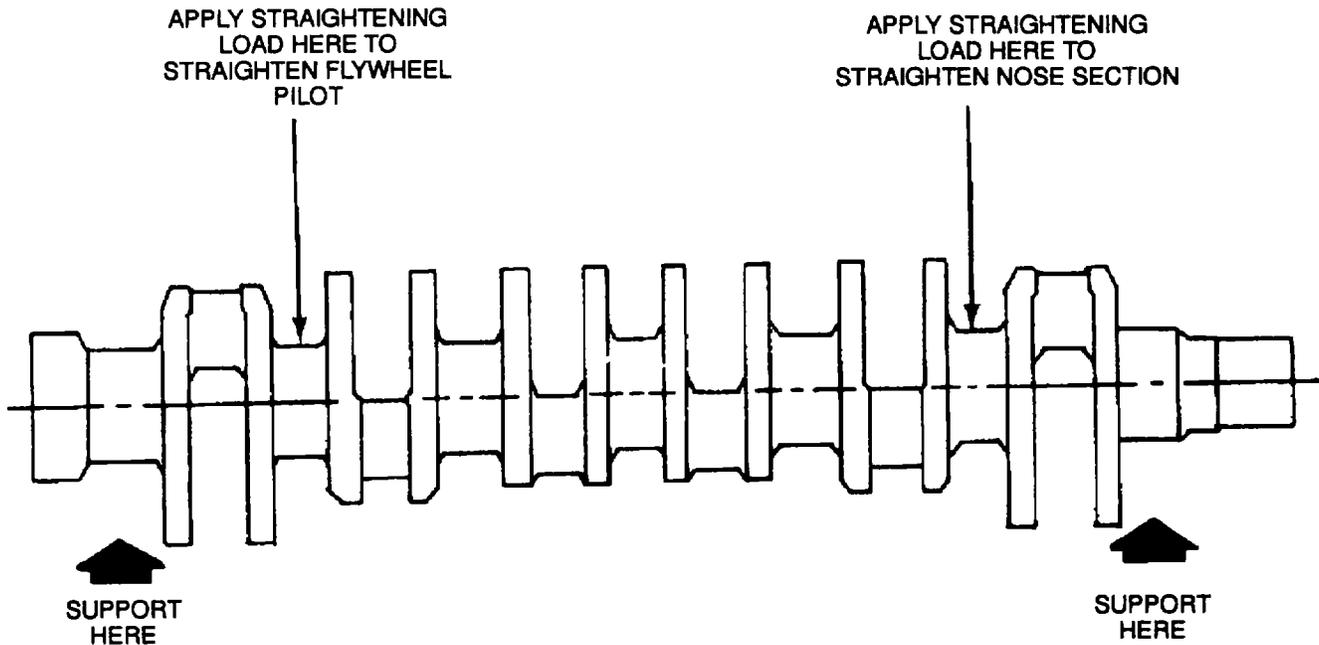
Straightening Nose Section and Flywheel Pilot Run-out
